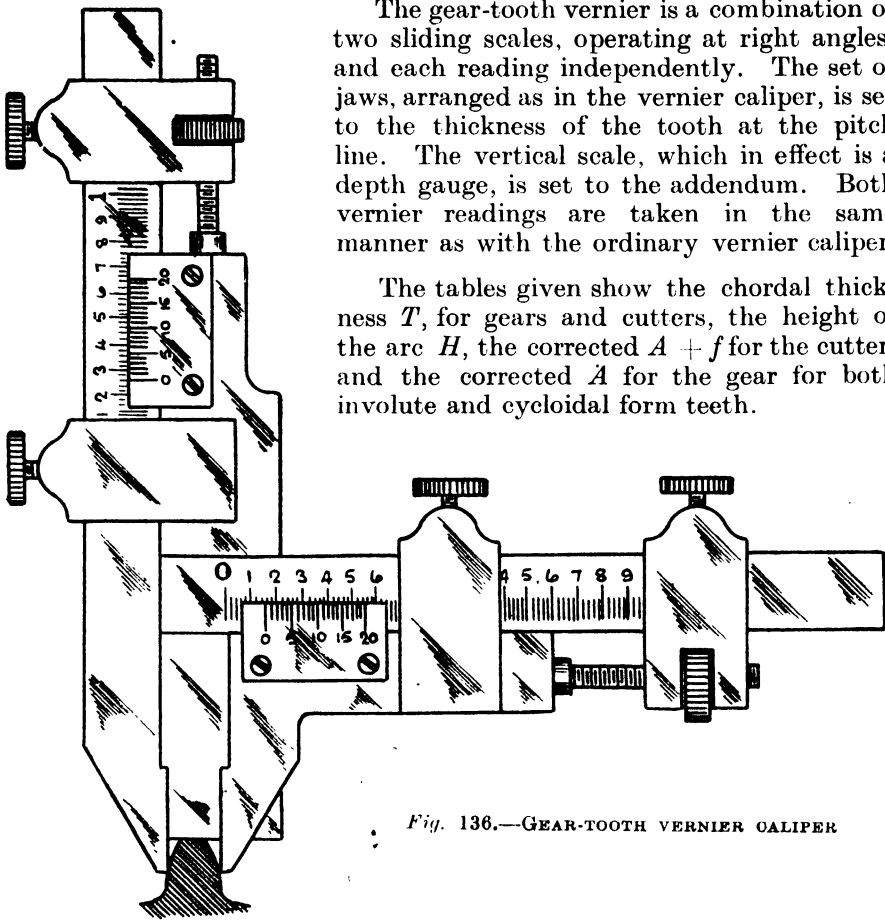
GEAR-TOOTH VERNIER CALIPER
